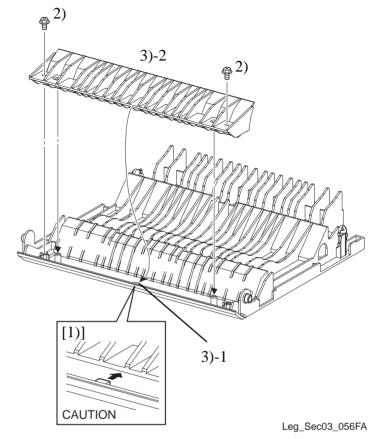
Removal of CHUTE-REAR UP and CHUTE-REAR LOW
